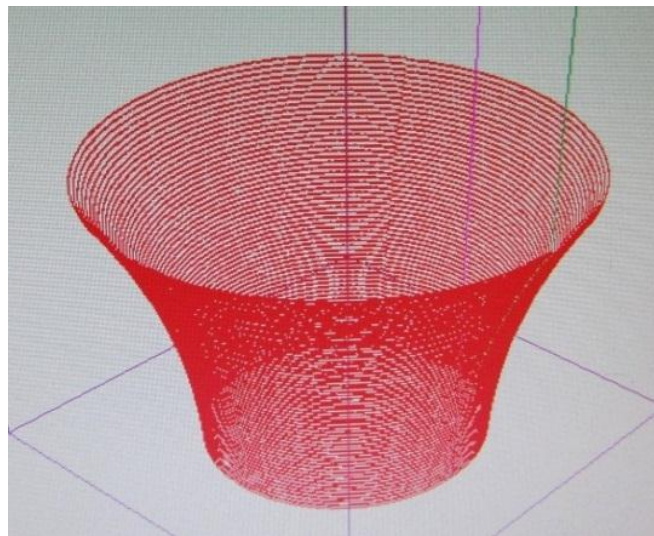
8: spiraling tool paths: Forming begins from top to bottom
